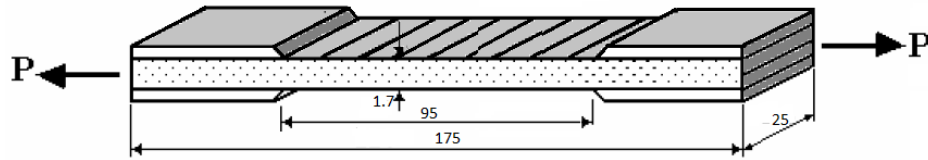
Test specimen geometry and dimensions for transverse tensile loading
